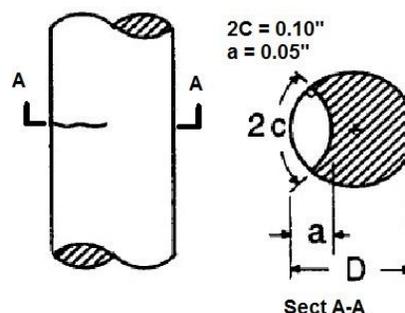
Revised Initial Flaw Size for Pins and Fasteners
